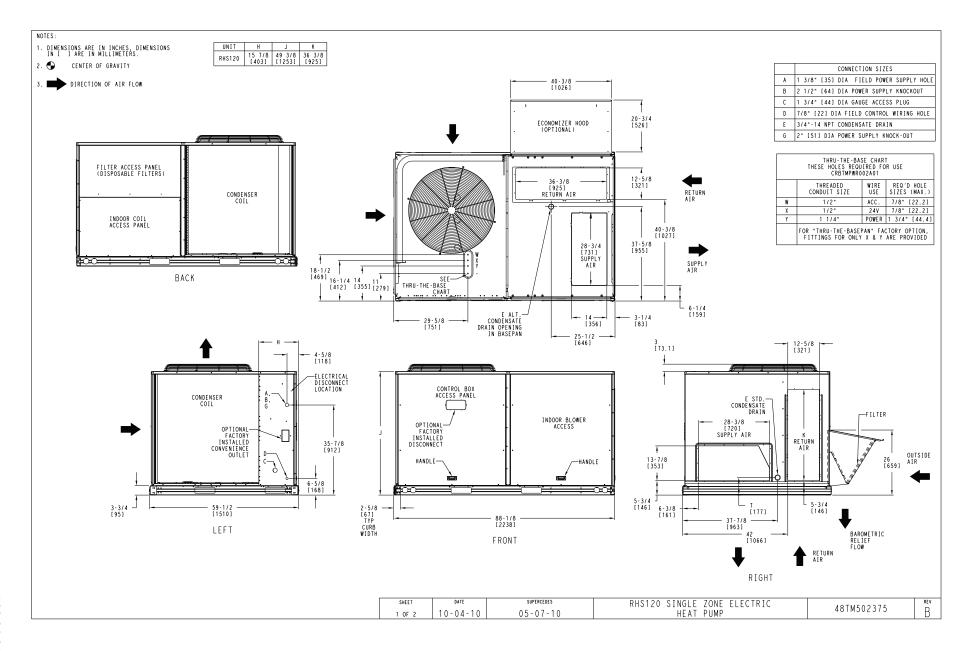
Unit Dimensional Drawing – 120 Size Unit
